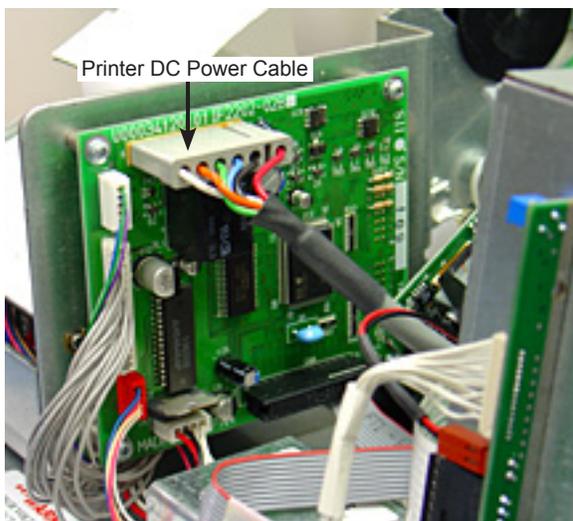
DC power connection at CN1 on the Printer Controller PCB
